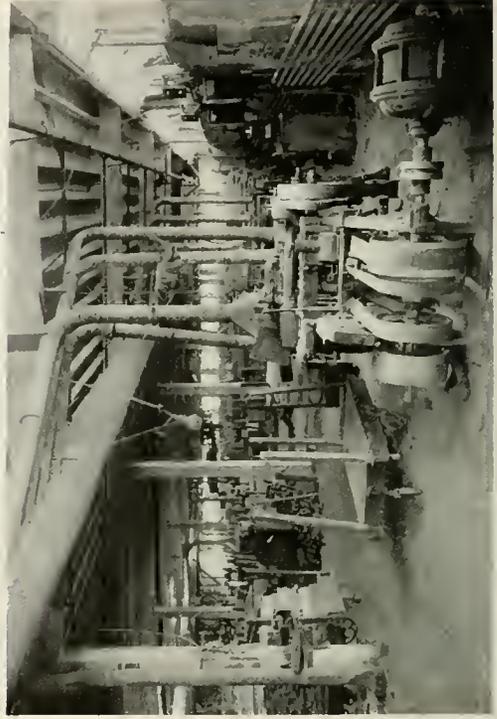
25-h.p., 1200-r.p.m., 220-volt Motor Driving Four-sided Moulder in Furniture Plant
